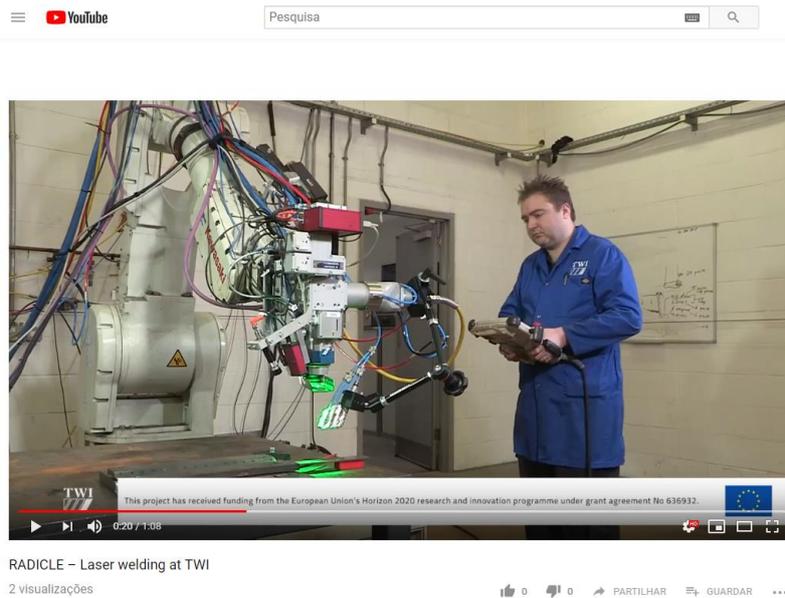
Laser welding with RADICLE system at TWI
